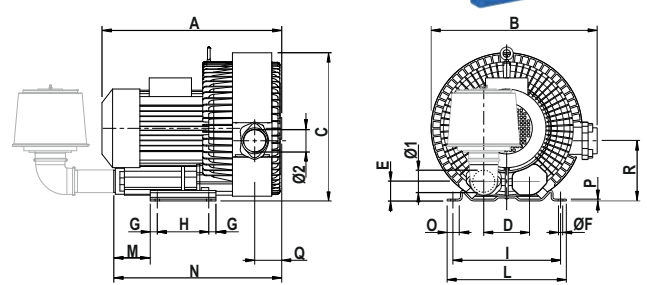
Double STAGE - Double CHANNEL - Double IMPELLER
